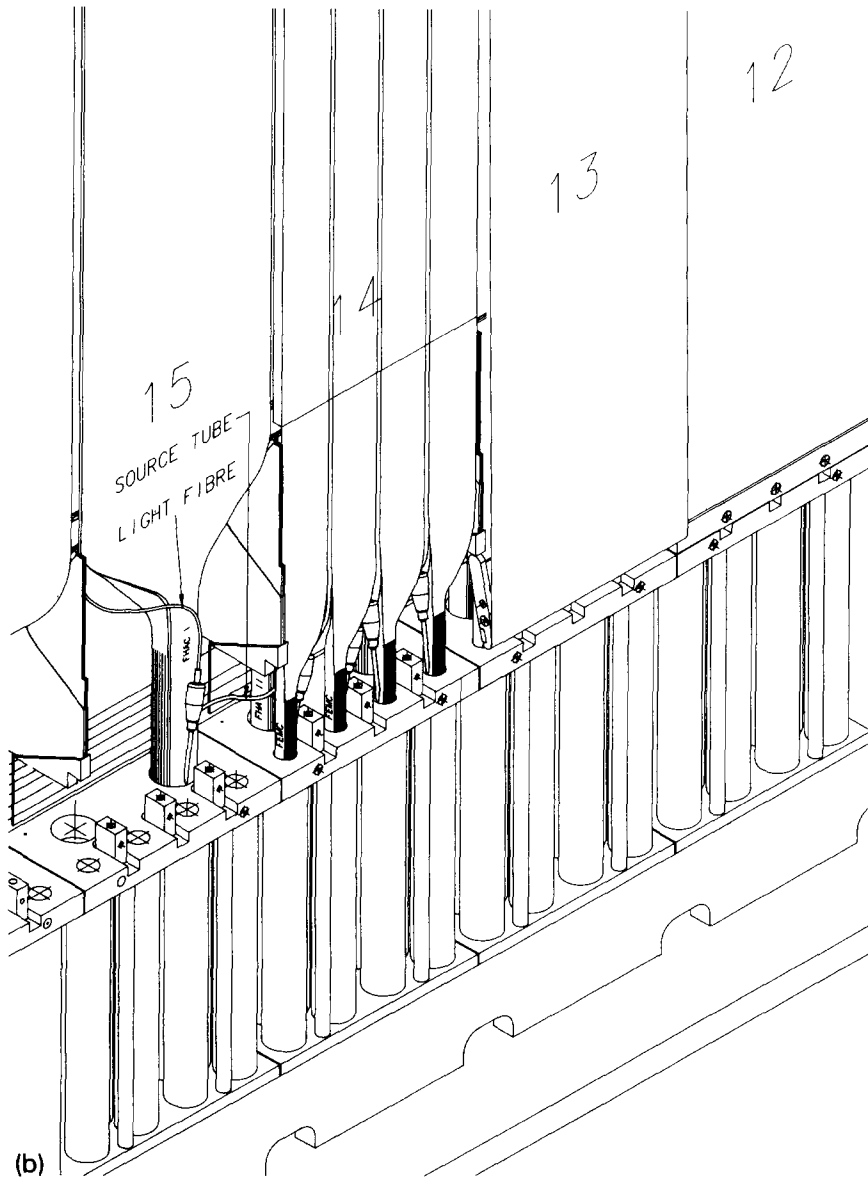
Detail of a stack showing DU plates with end pieces, scintillator tiles and spacers (HAC section).
